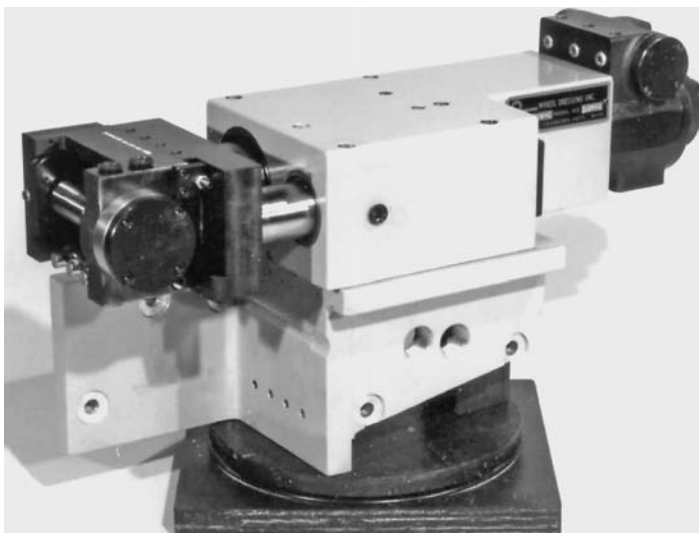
Single-barrel hydraulic-driven infeed system.
